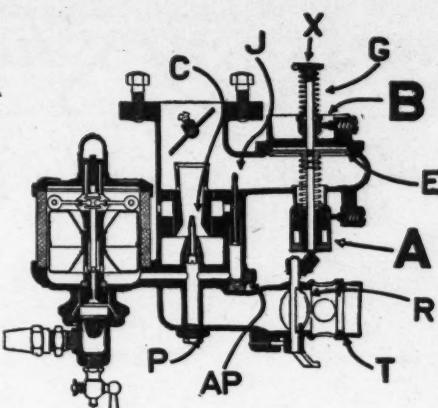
Sectional view of the Stromberg G 2 carburetor
